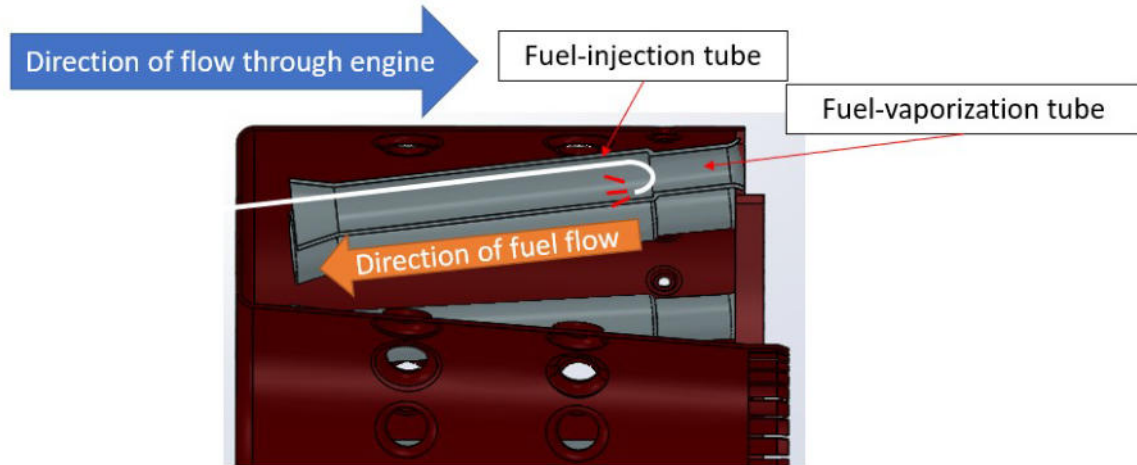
Fuel-injection scheme shown through the cross-section of the stock P400 combustor
